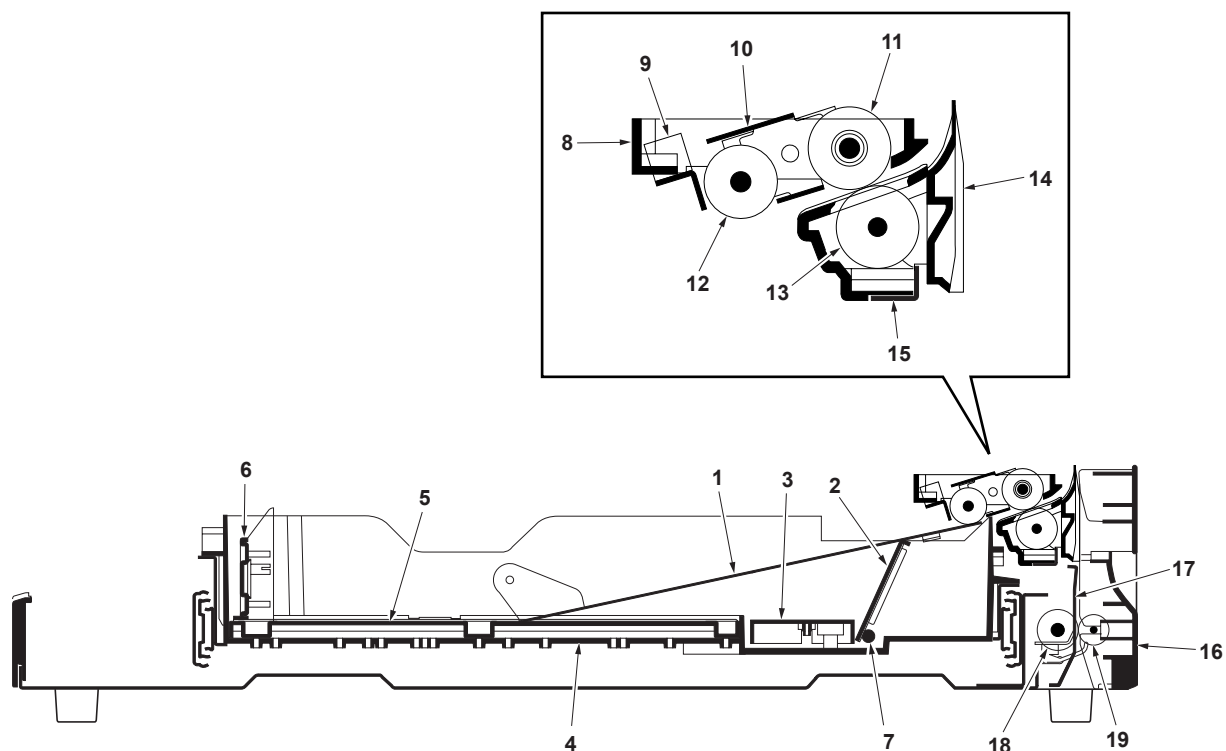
Paper cassette, primary paper feed unit and paper feeder feed section
